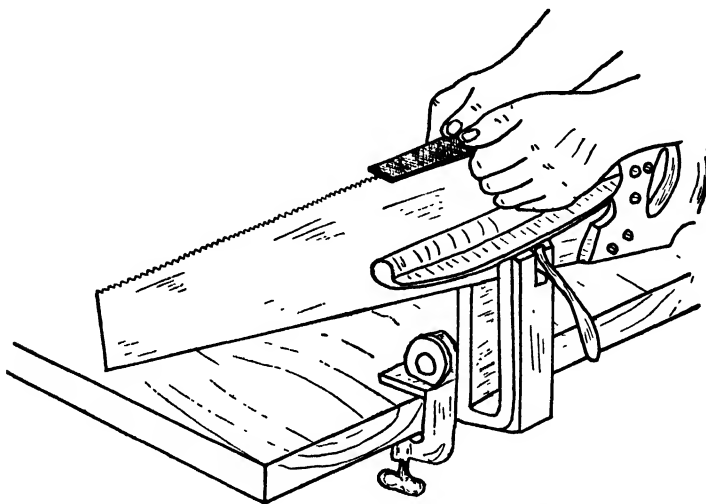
A saw may be jointed with a file held in the hands if care is used to keep it square with the saw blade.
